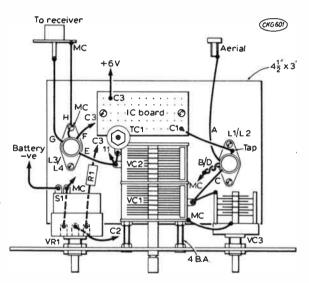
Top view of the chassis showing position of the IC board and major components.
